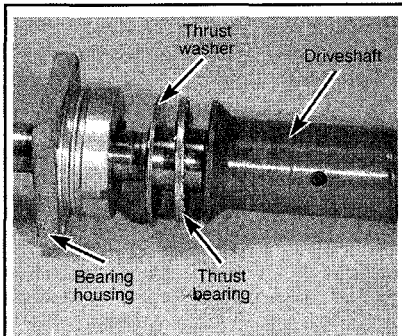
To shim the driveshaft, start by assembling the bearing end...
